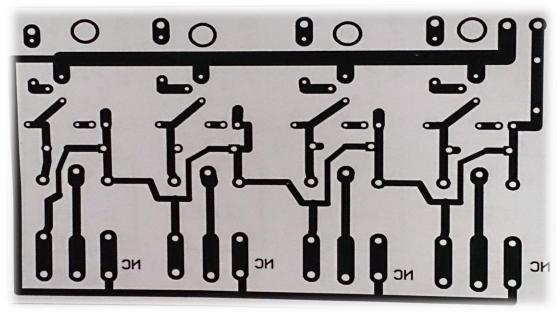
PCB LAYOUT FOR RELAYS AND MOTORS
